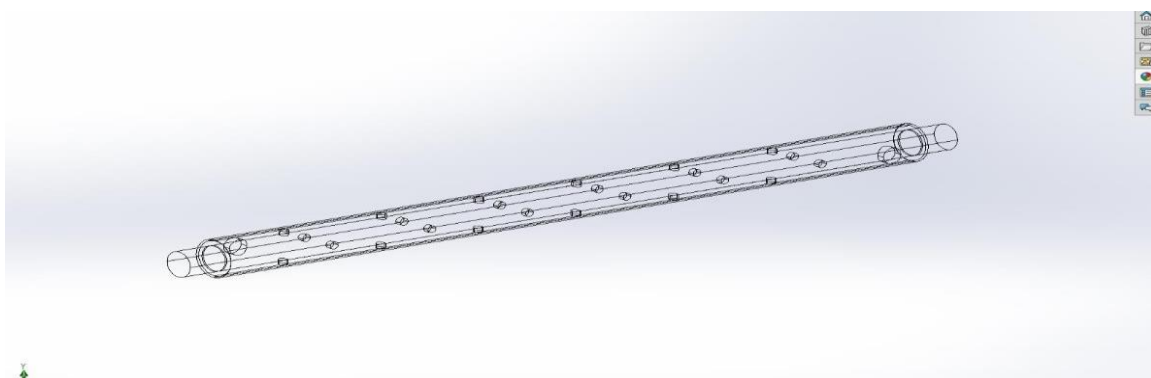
Double pipe heat exchanger with protrusions final assembly model.
